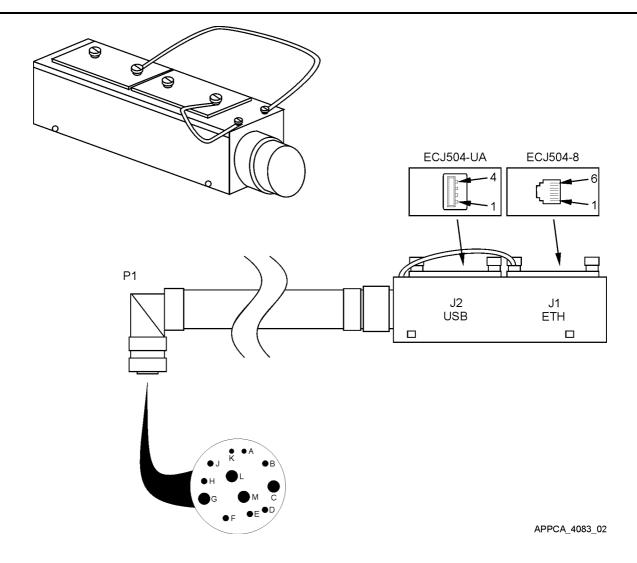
P/N 881288 W5 EIAD Cable Assembly
